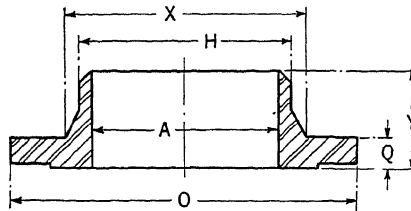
TYPICAL WELDING FITTINGS
